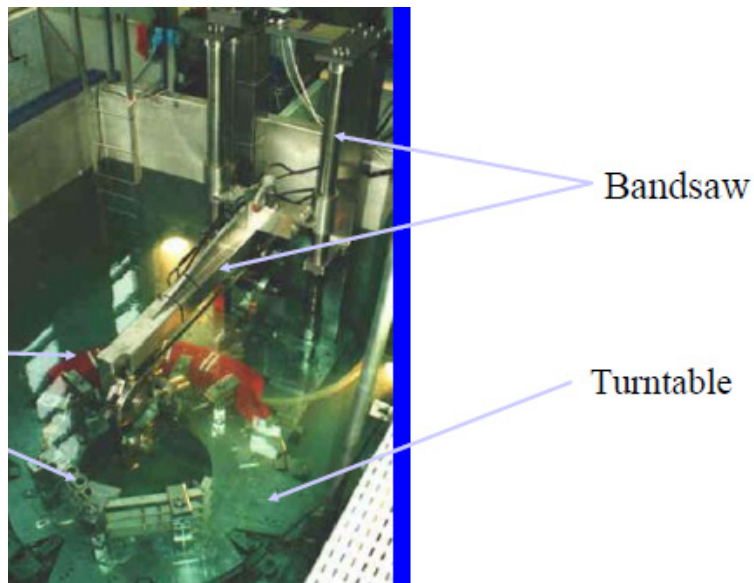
Equipment developed for deployment inside the BR-3 vessel.
